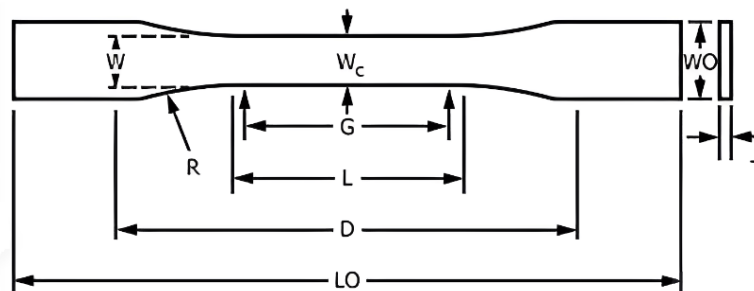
Specimen for V-type tensile tests. The dimensions are defined in ASTM D638-14.
